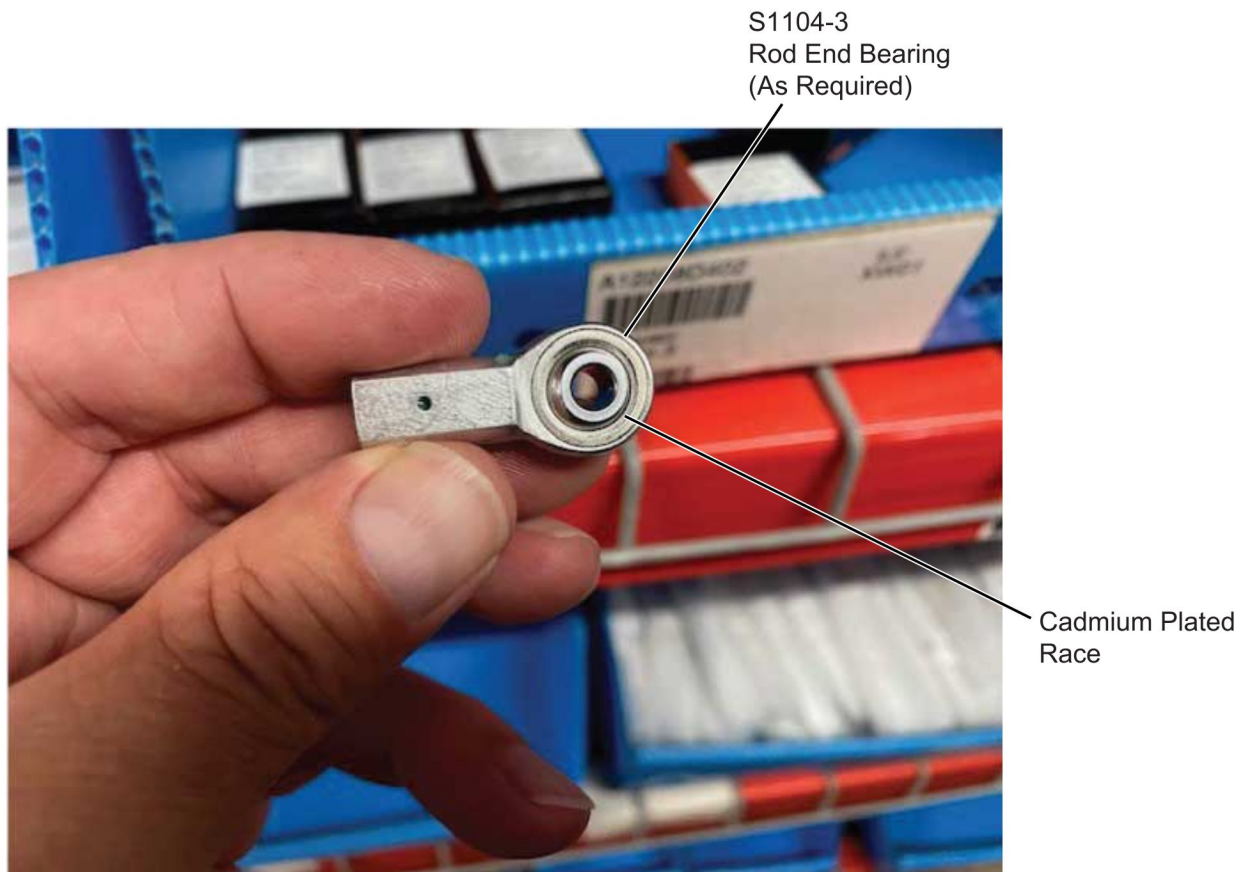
Rod End Bearing Inspection/Replacement (Sheet 3)
